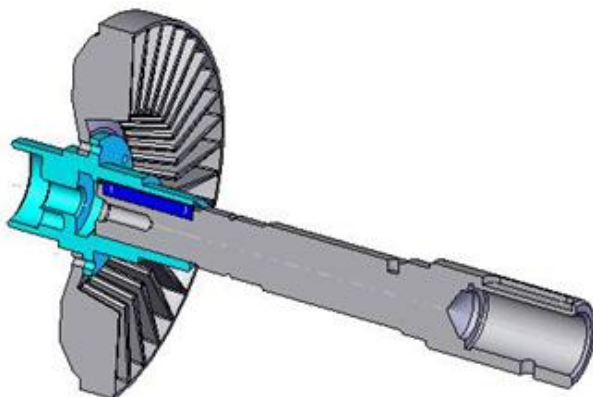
The turbine shaft – main shaft subassembly with the turbine wheel in longitudinal section.
